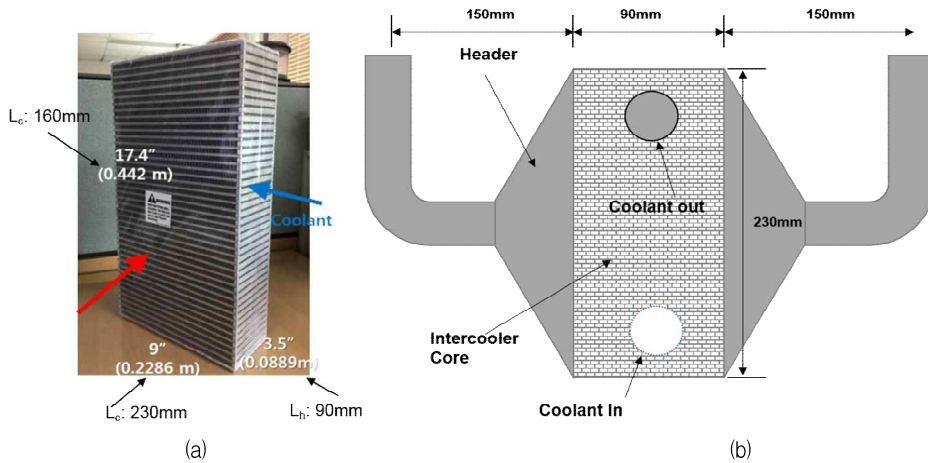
(a) Intercooler core dimensions and (b) Intercooler module layout
